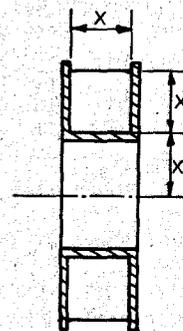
Recommended dimensions of bobbin design. All dimensions are related to 'x' — thus if the measurement specified for 'x' is 1" then the winding width and depth are both 1", and the bobbin internal diameter is 2".
